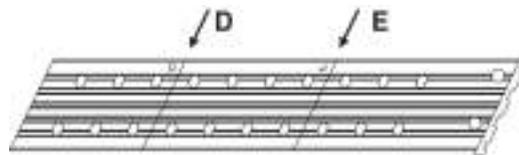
ADJUSTABLE SHOE CUT LOCATION (CUT WHEN REQUIRED)
